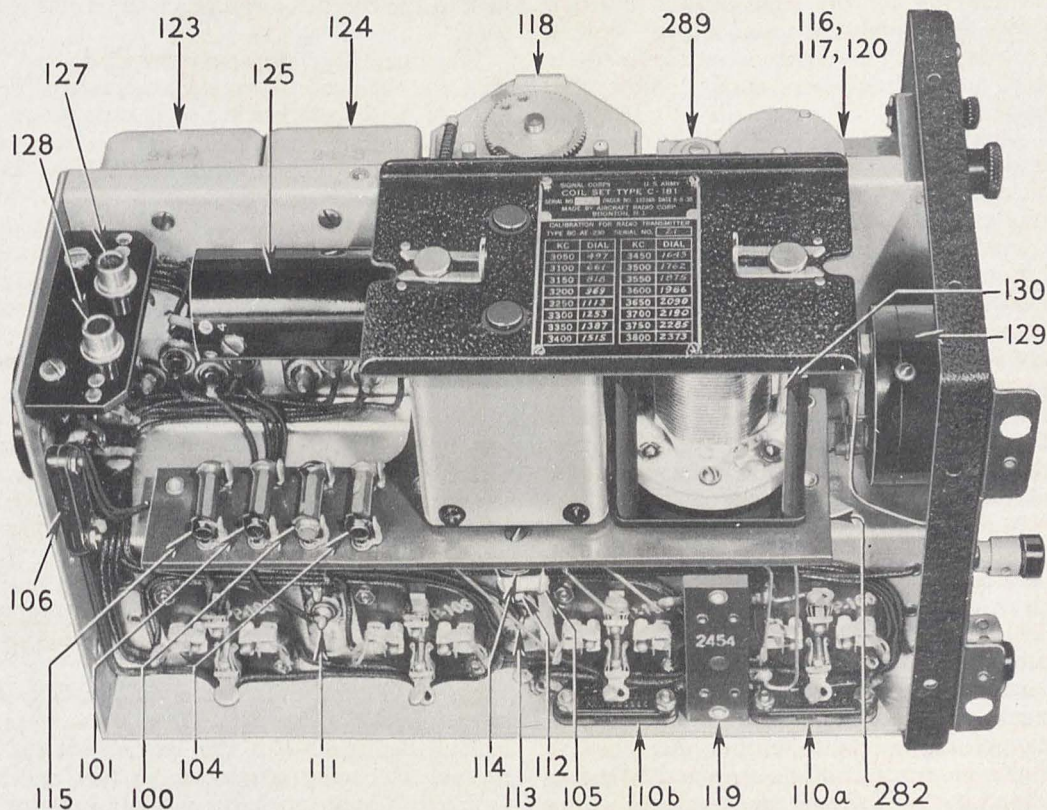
RADIO TRANSMITTER, TYPE BC-AH-230; BOTTOM VIEW WITH CASE REMOVED AND COIL SET IN PLACE
